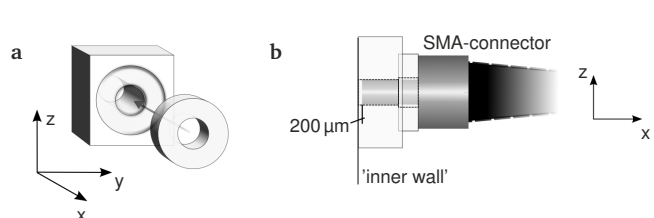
a Detail of plug-optics assembly. To fabricate the plug-optics connector, a cylindrical socket with a design-diameter of 3 mm is laser-cut into 5 mm thick PMMA applying the optimized conditions $P = 100, S = 5$ and $F = 5000$ at 1200 dpi using the Epilog Mini 24 laser writer. Subsequently, the thickness of the block is reduced in a concentric circular area by laser engraving applying 'raster' conditions of $P = 35, S = 12$ and $F = 5000$ at 1200 dpi. A 3 mm thick PMMA disk comprising a cylindrical socket with 3.5 mm design-diameter cut applying $P = 100, S = 5$ and $F = 5000$ and equally reduced in thickness by laser-engraving. The disk is glued into the pre-structured area on the 5 mm thick PMMA. b A SMA fiber-connector plugged into the described unit is firmly clamped, leaving the end-facet at a distance of approximately 200 μm from the 'inner wall'.
